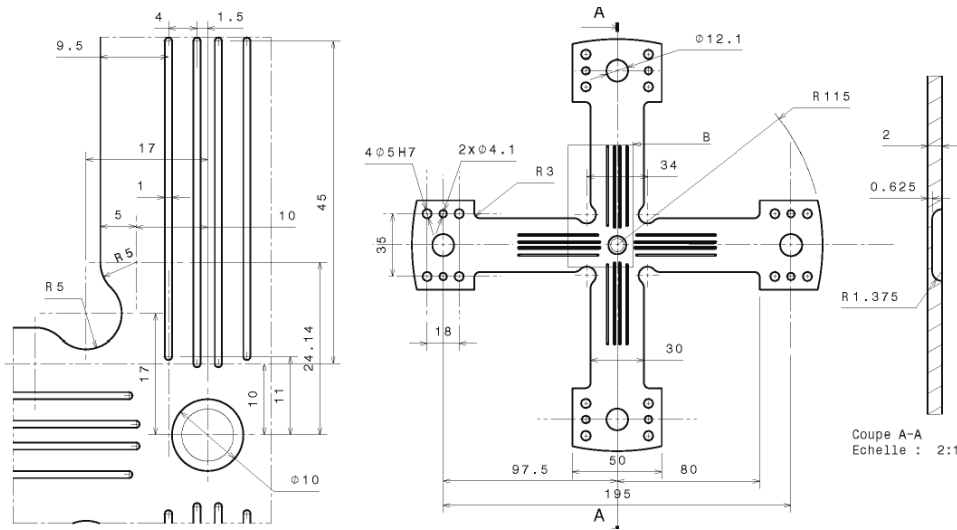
Dimensions (in mm) of the cruciform specimen designed by [115]
